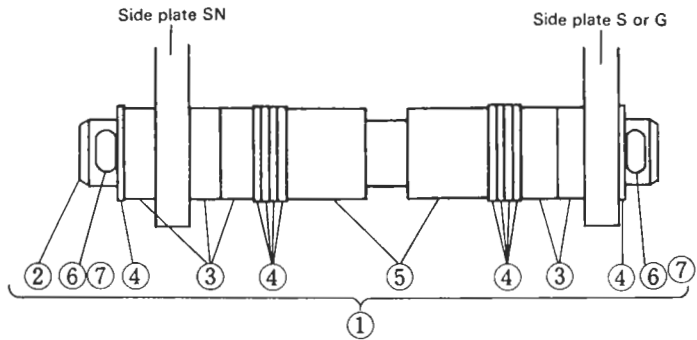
Suspension shaft W30 assembly. (0.5 t, 3 t)
